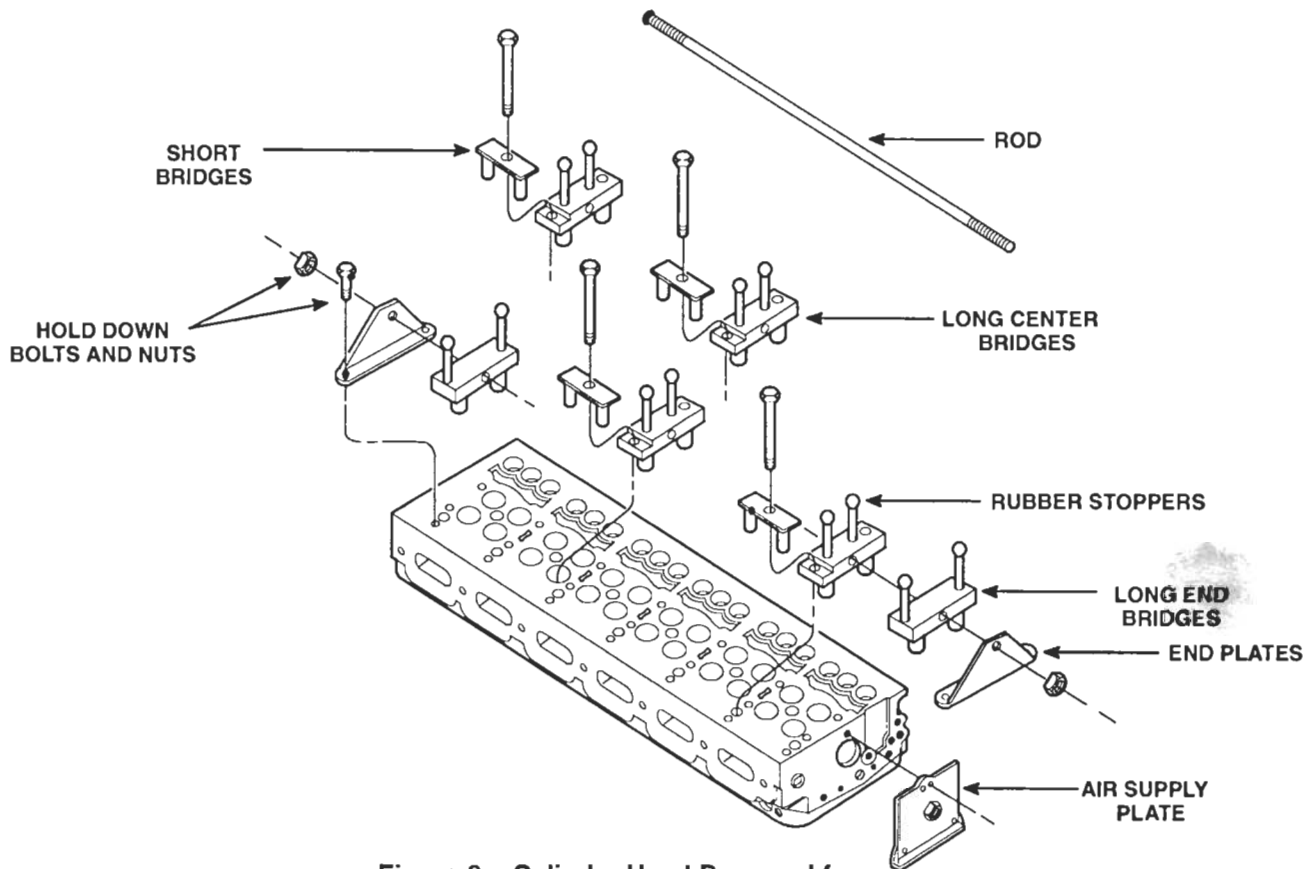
Cylinder Head Prepared for Pressure Test using Tool J 28454
